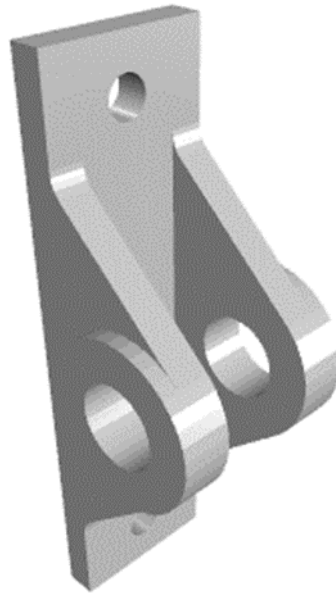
The "Bearing Block" part used to represent low-end joining potential.
